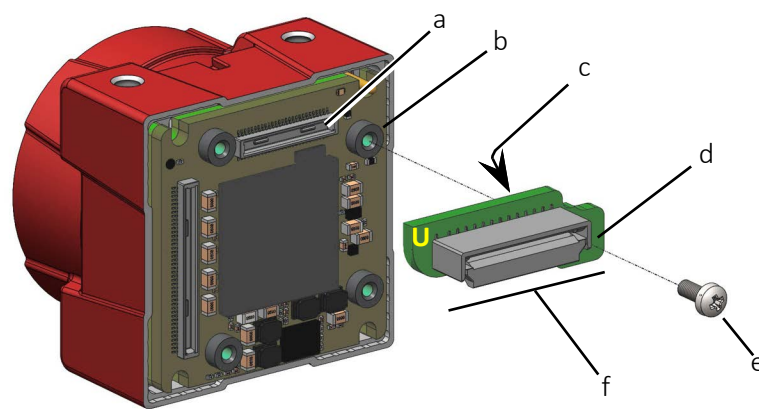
Alvium USB Flex camera, Interface Board, and screw
